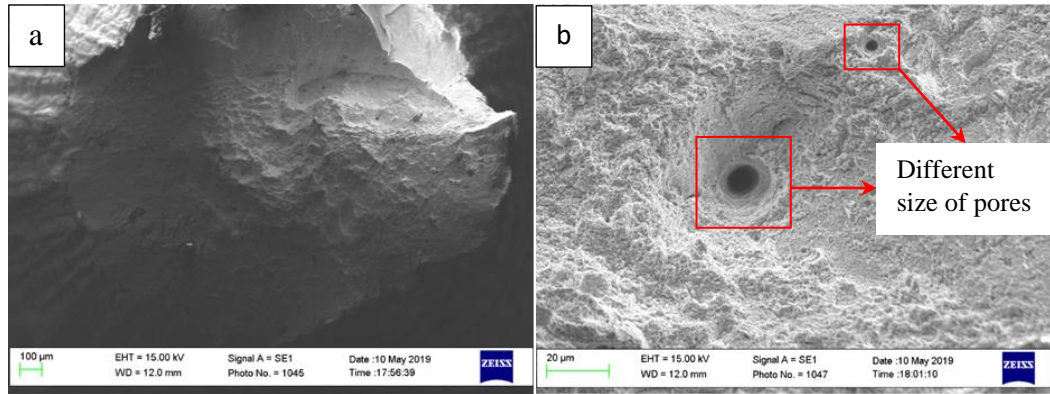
SEM fracture surface of tensile specimen (a) fisheye, (b) high magnification of dimples
